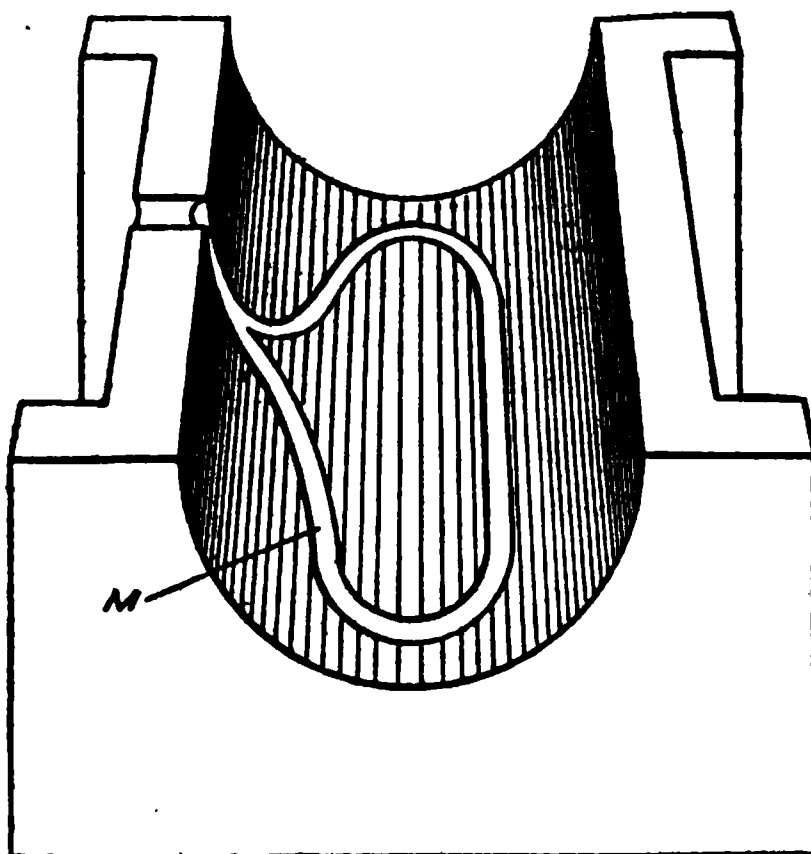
,036.—One method of grooving a journal to secure uniform distribution of the oil.
